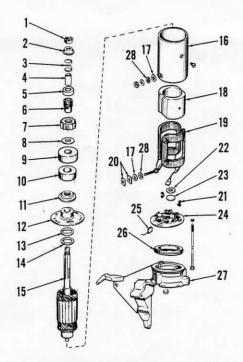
Exploded view of late type starter. Earlier starters are similar.
